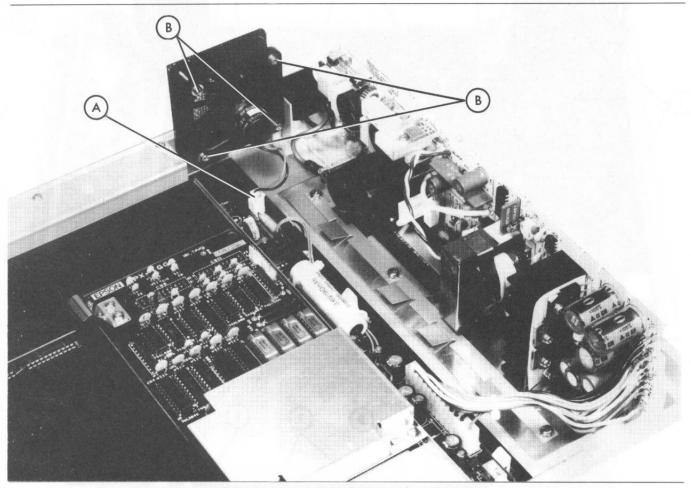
FAN REMOVAL/REPLACEMENT
